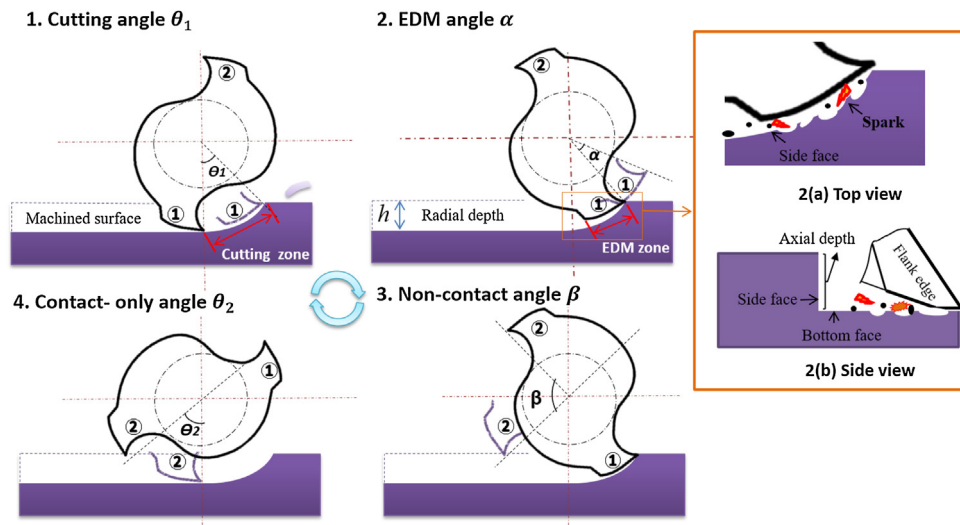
EDM-end milling machining mechanism (feedrate  $\approx 0$ ).
